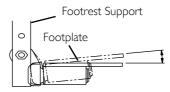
Perpendicular and/or Inversion/Eversion Adjustment
